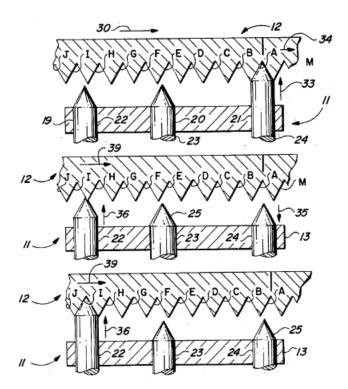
illustrates a gearing comprising a gearing comprising a fixed base (11), cam shafts (22), (23) and (24), a cam follower comprised of apertures (A-M) and an output shaft (12). Reciprocating motion of each of the cam shafts (22), (23) and (24) is induced by respective solenoids (29). This motion is converted into rotary motion of output shaft (12) see arrow (30) via lateral force (39). The reciprocation is along and parallel to the axis of rotation.
